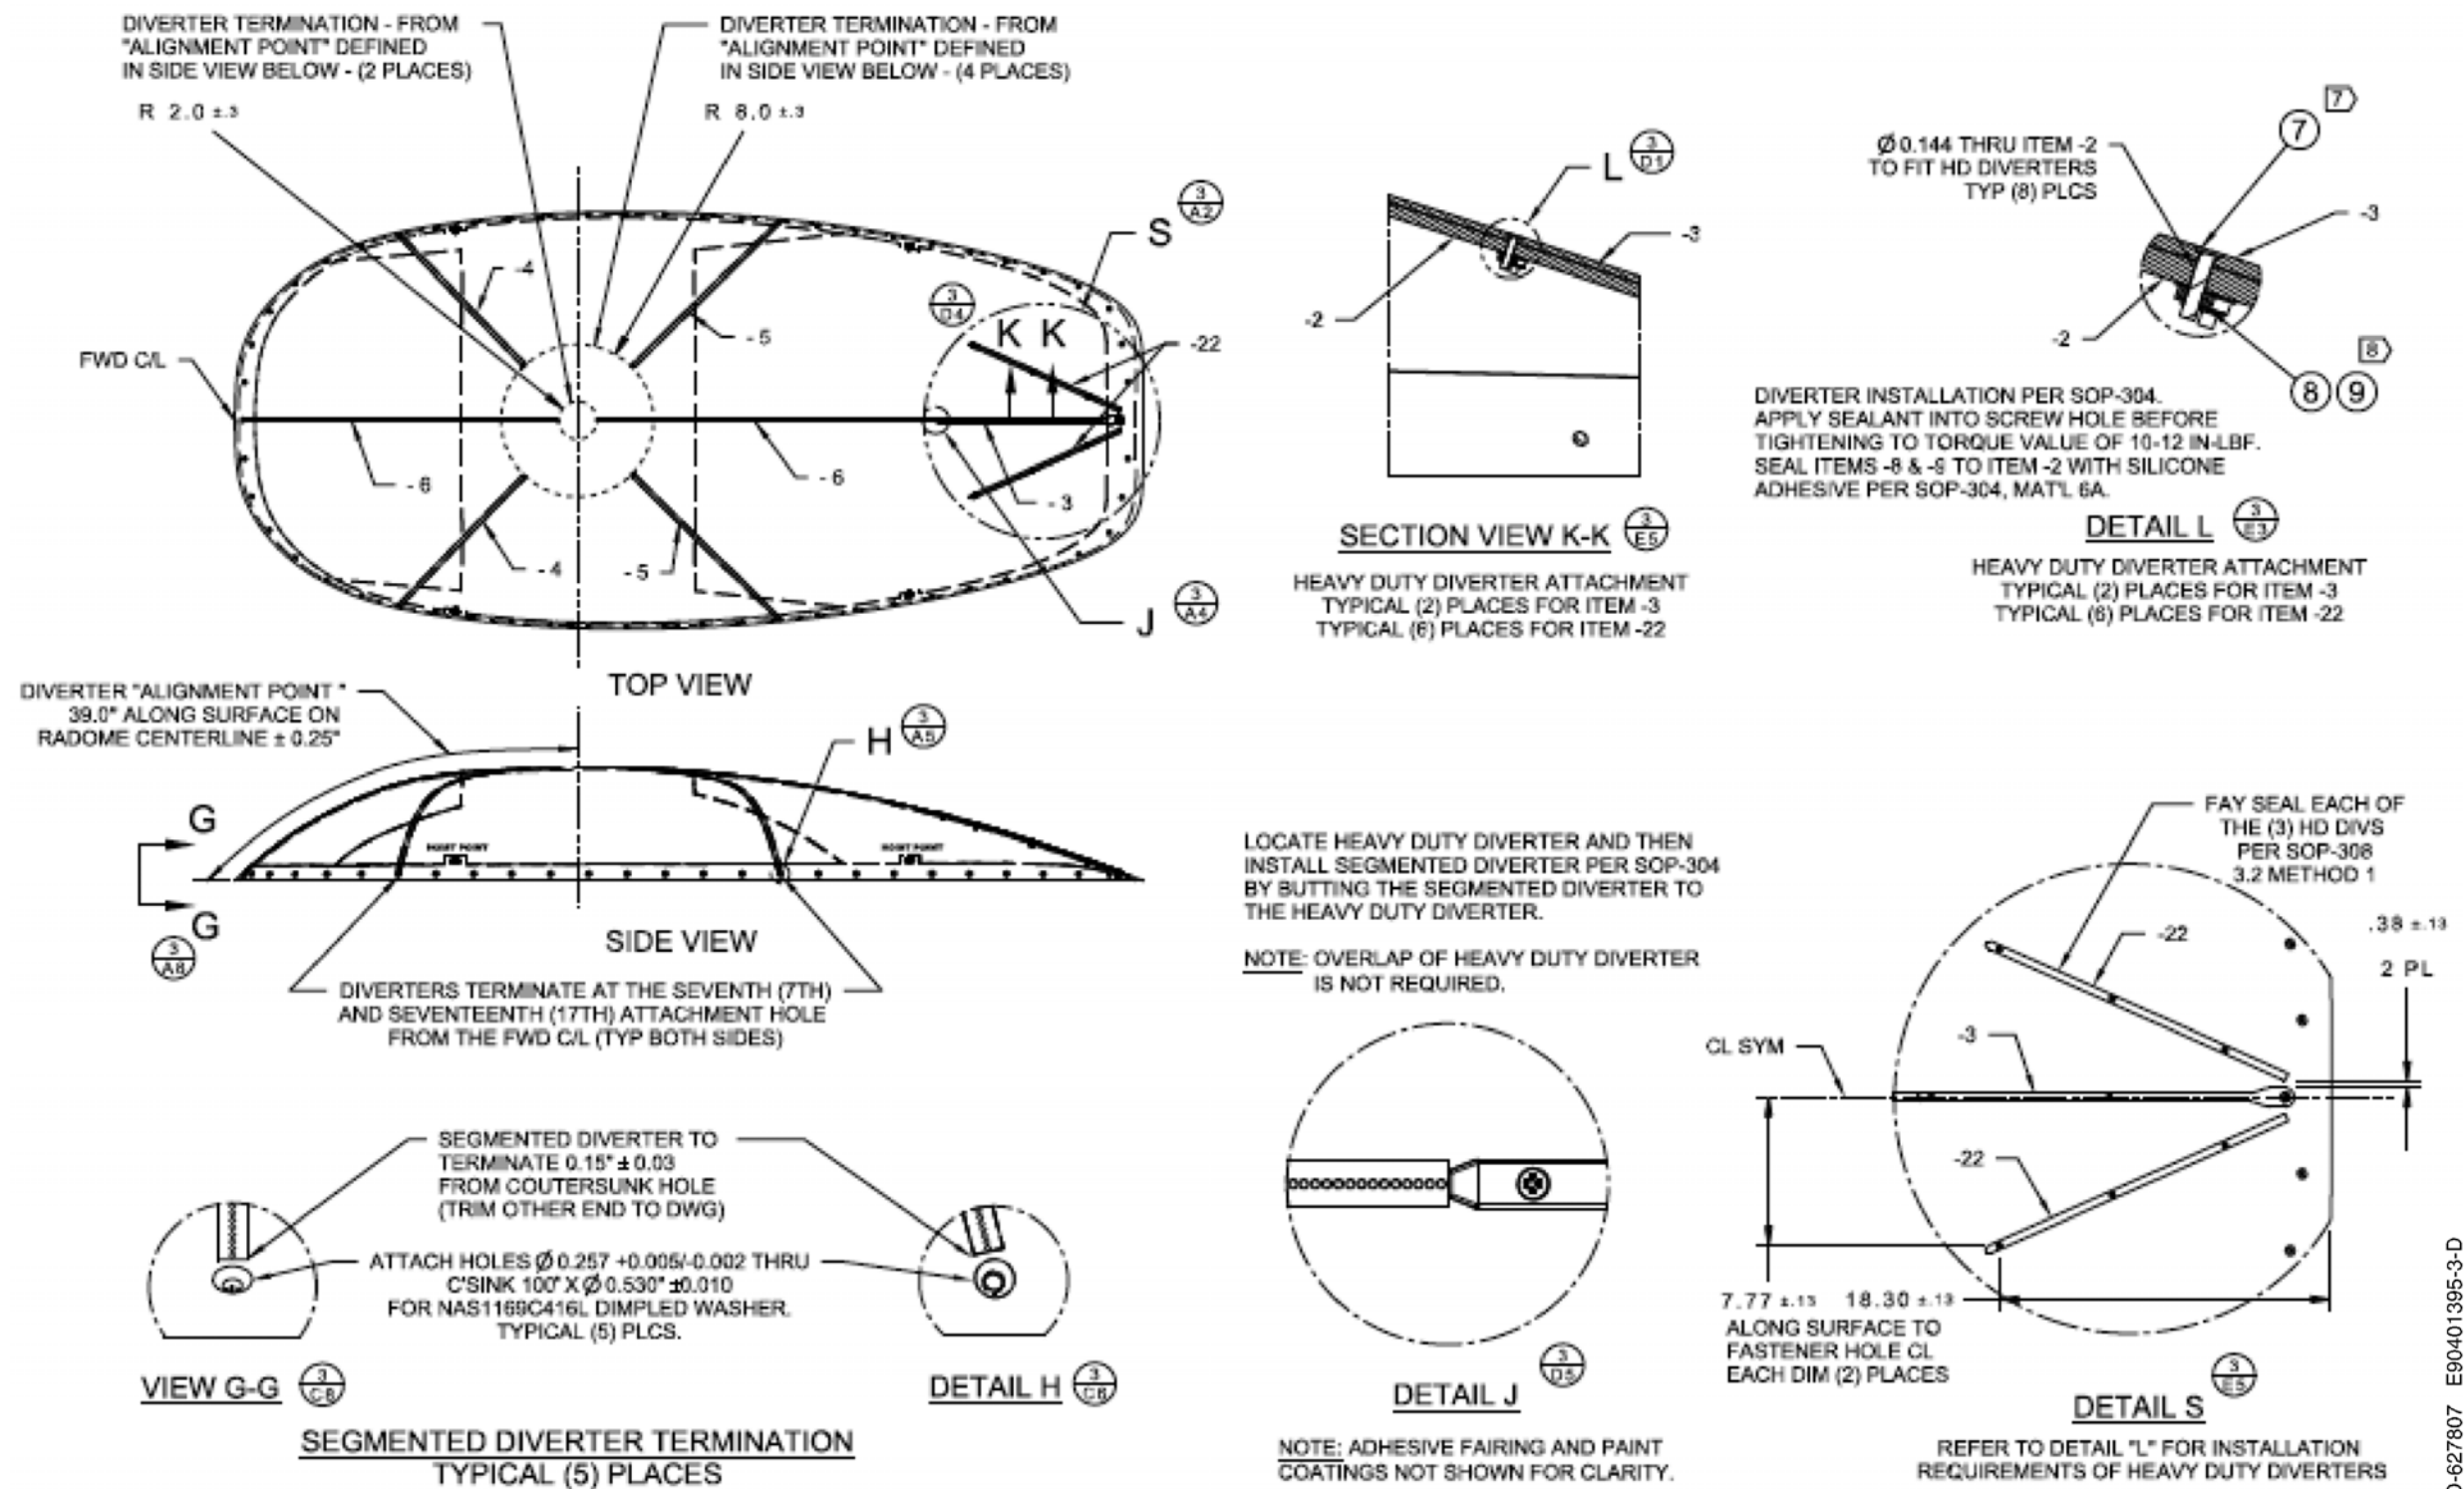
(Sheet 3 of 6) Fuselage Mount Radome Outline and Installation Drawing (90401395, REV D)
